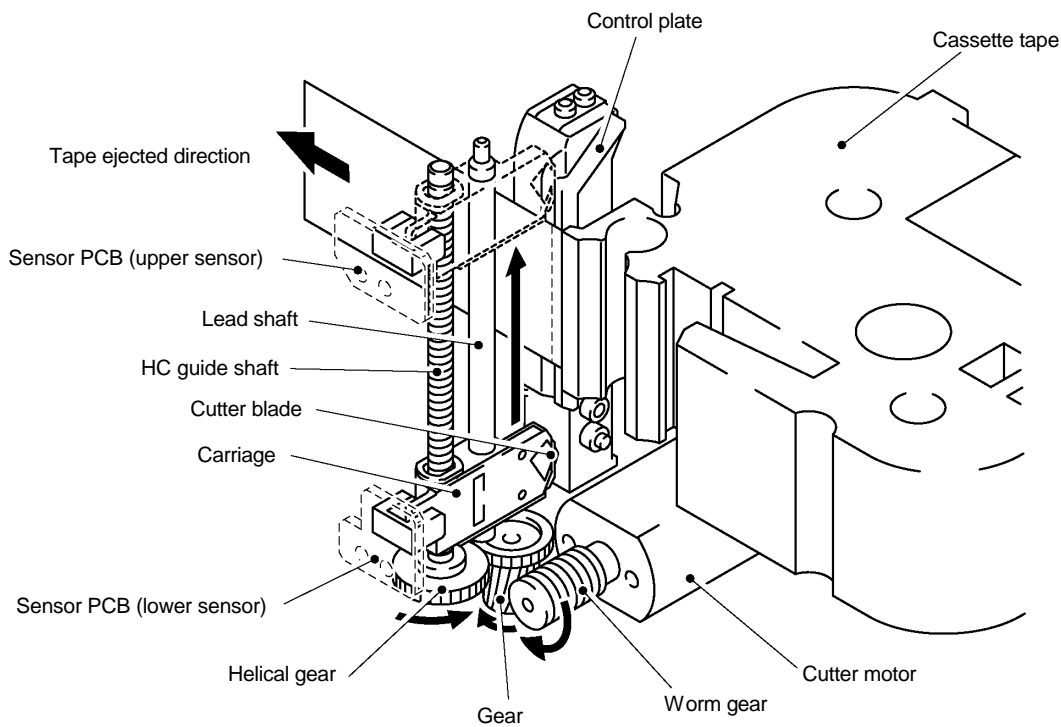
Tape Automatic Full Cutter Mechanism
